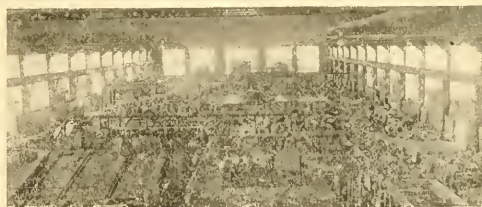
GENERAL VIEW OF ROLLING MILL
